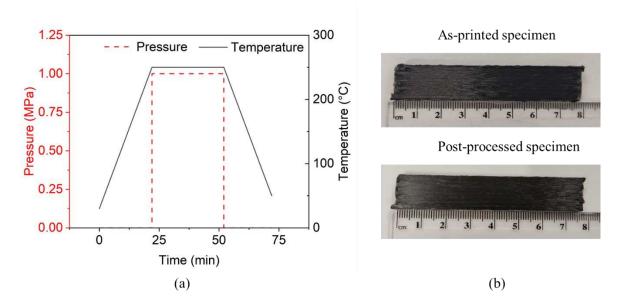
(a) Hot-press program and (b) as-printed and post-processed printed specimens.
